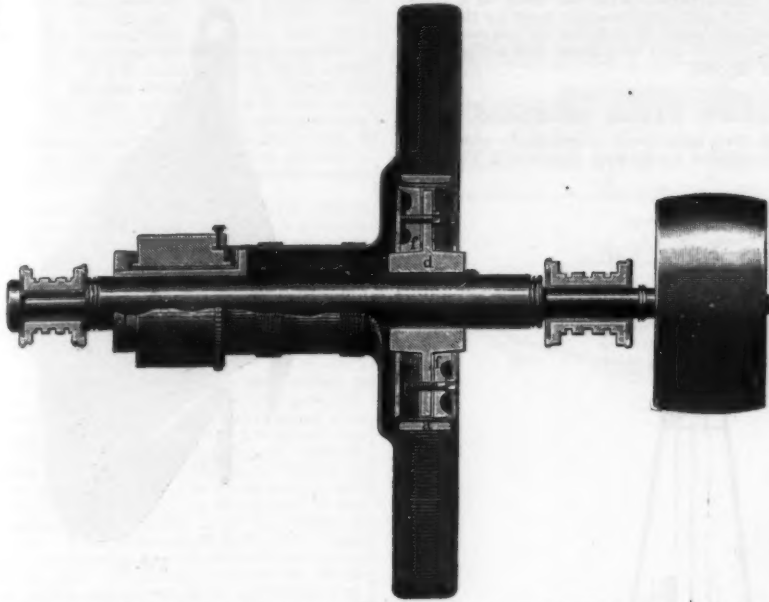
SHAFT OF THE DYNAMO WITH A RING FORMING A FLY WHEEL.
